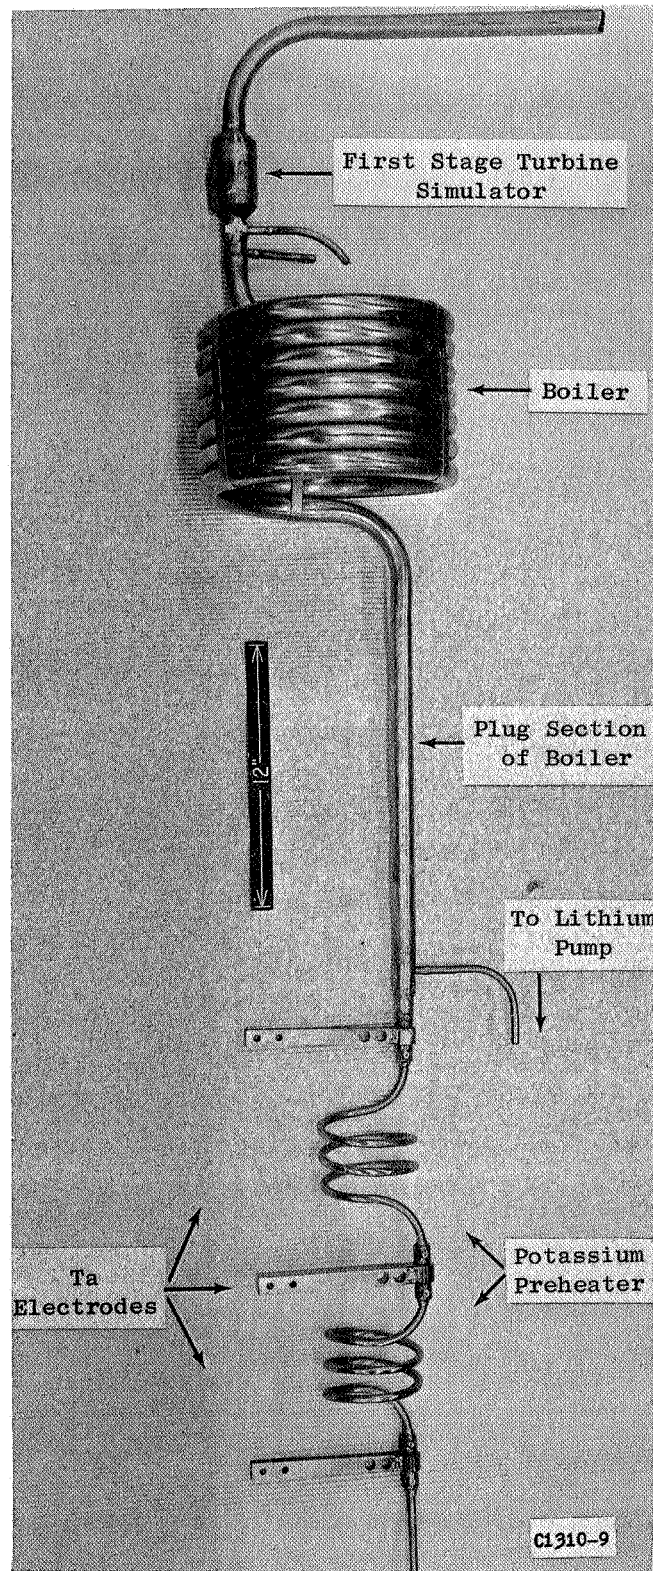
Potassium Preheater - Boiler - First Stage Turbine Simulator Assembly Following Postweld Anneal.
